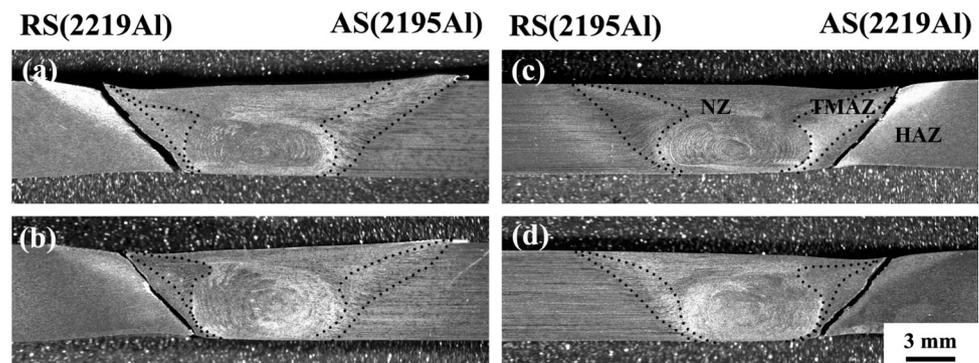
shows the fracture locations of the FSW joints under various welding parameters and material positions. All the joints fractured at the HAZs on the 2219Al-T8 side (Fig. 12a–d). The fracture path of the joints was along the LHZs on the 2219Al-T8 side and was about a $\sim 45^\circ$ to the tensile axis. Joint 2219AS-1200-800 showed the fracture location
